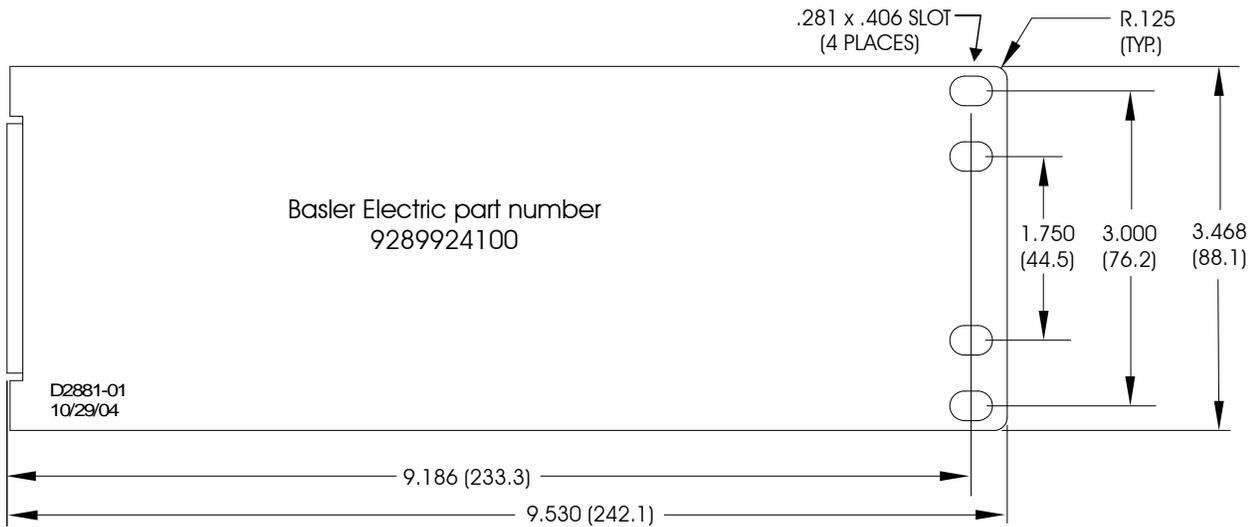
Adapter Bracket for Mounting a Single Relay in a 19-inch Rack
